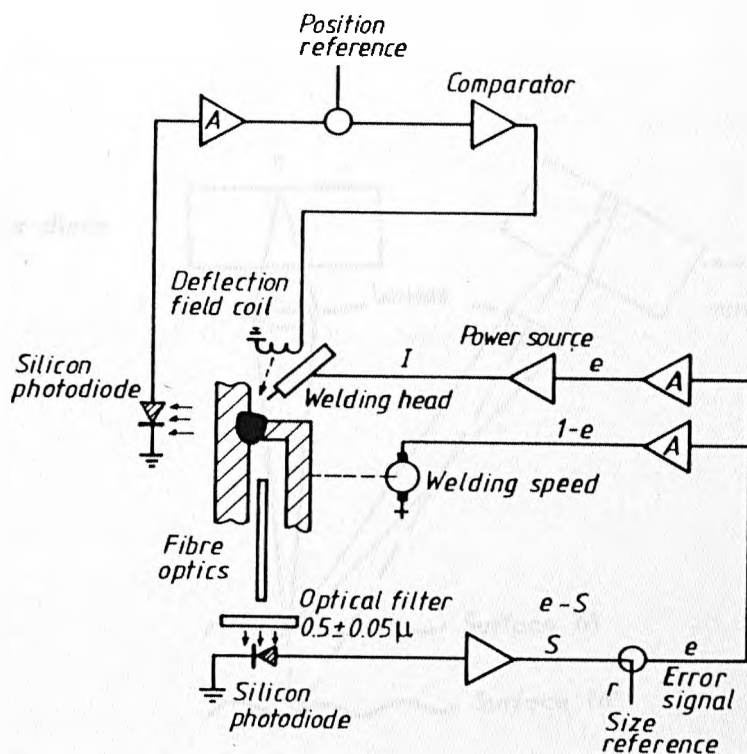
Backface sensor to detect the pool size and welding position
